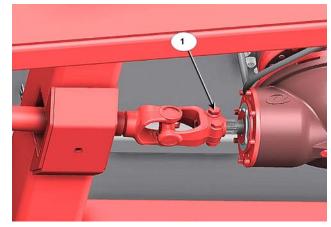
Attach the Driveline to the Screw Planetary 224292C
